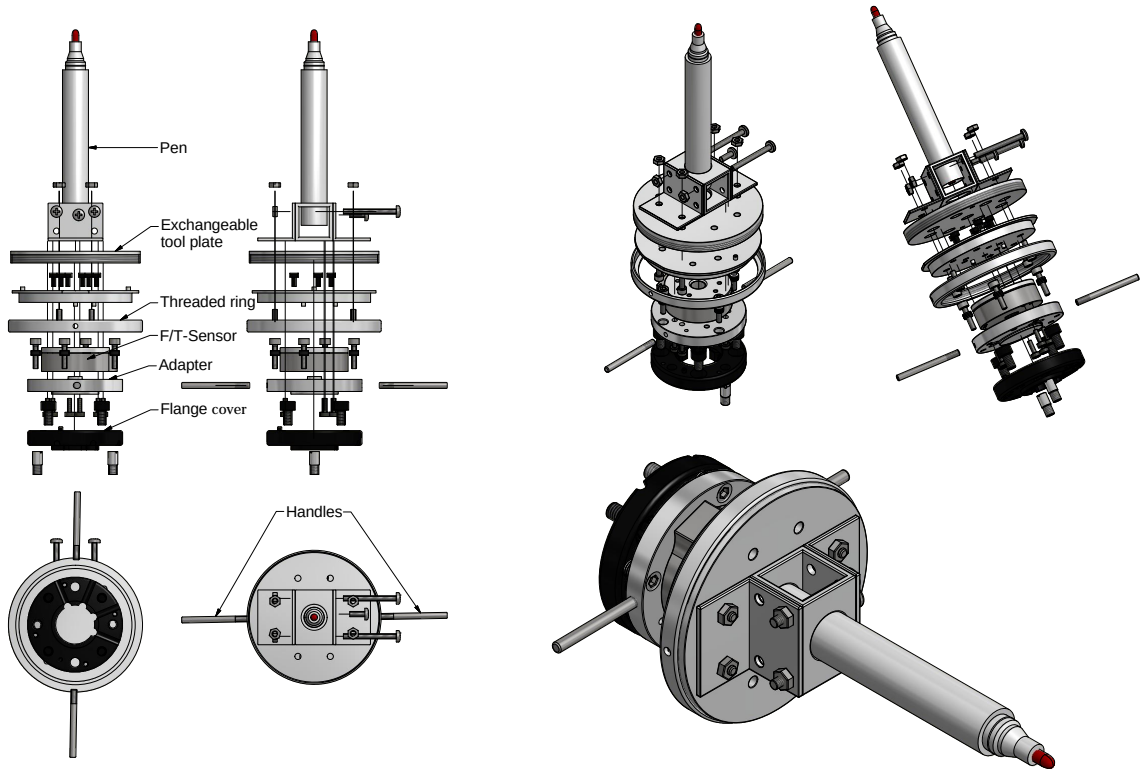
CAD explosion views from the pen tool with an assembled view in the lower right corner.
